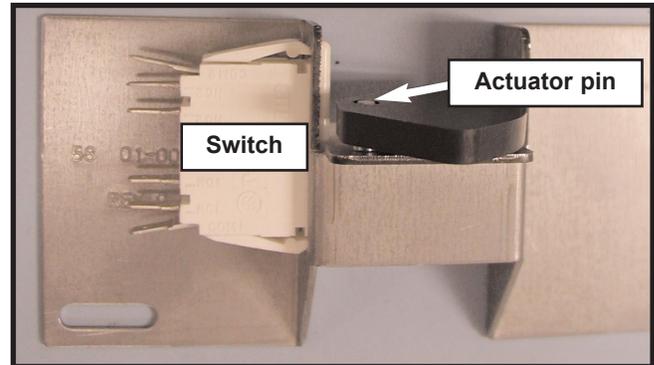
Belly Door interlock switch and actuator on mounting bracket.
